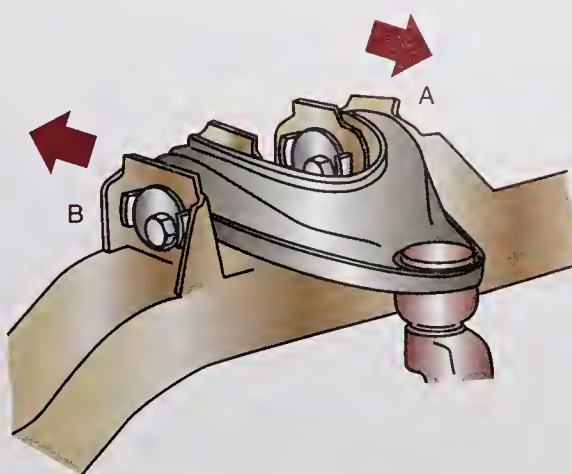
To increase the positive caster, move the front of the upper control arm (A) outboard and move the rear of the upper control arm (B) inboard.
